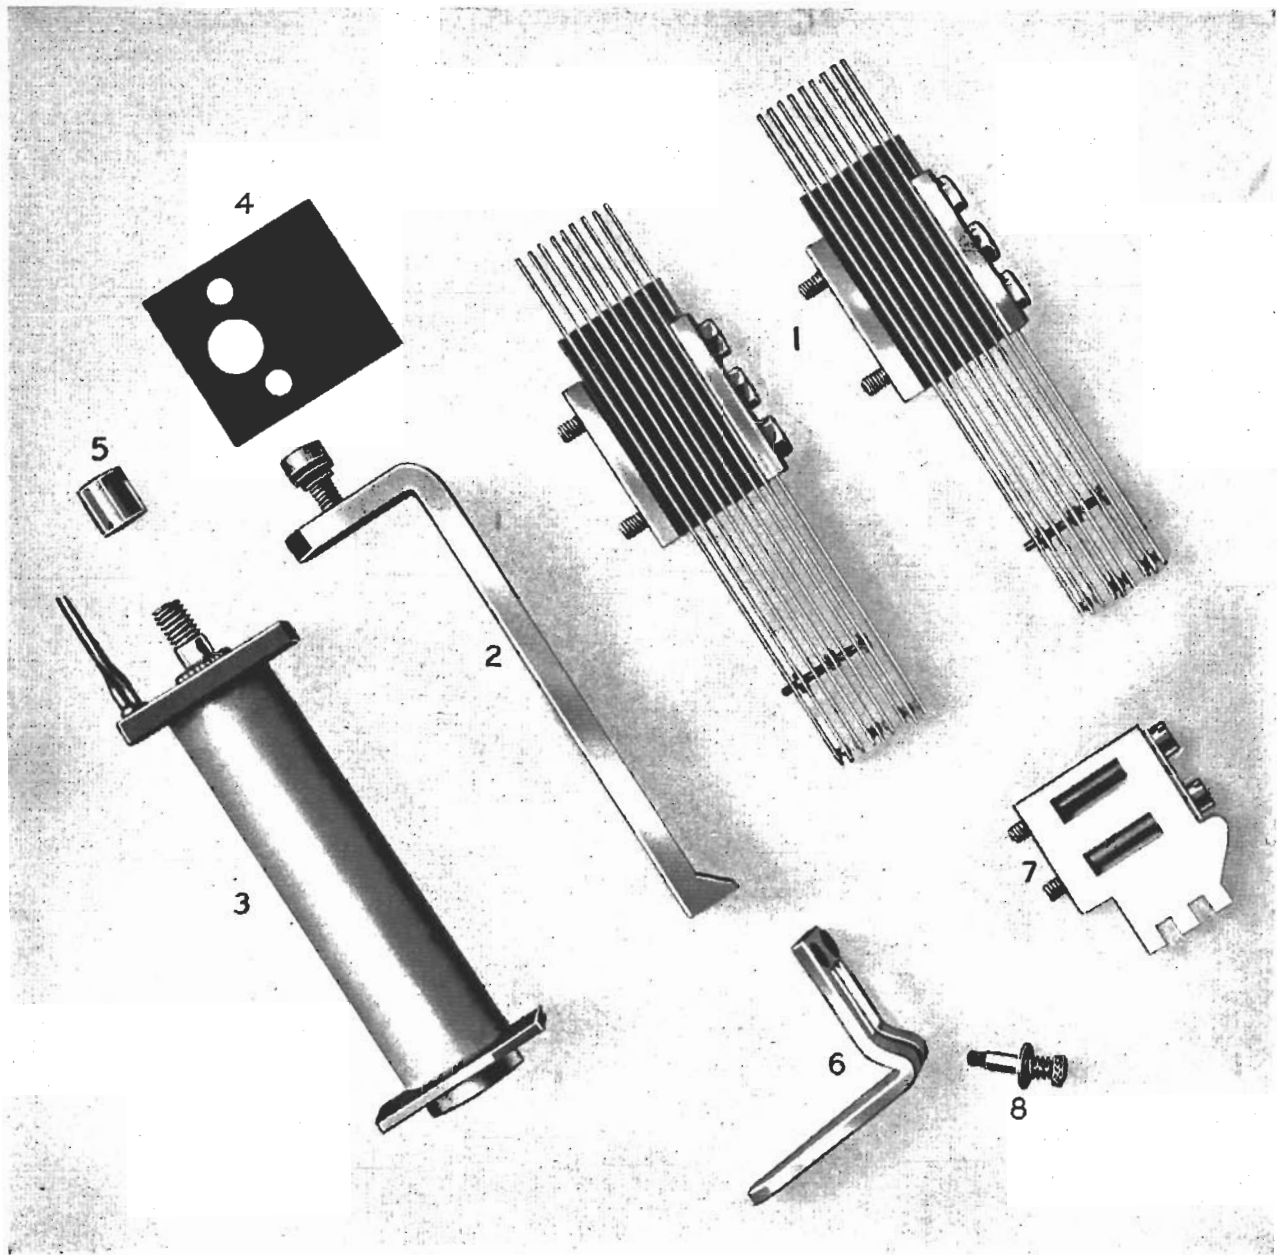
Component Parts of P.O. Type-3000 Relay
